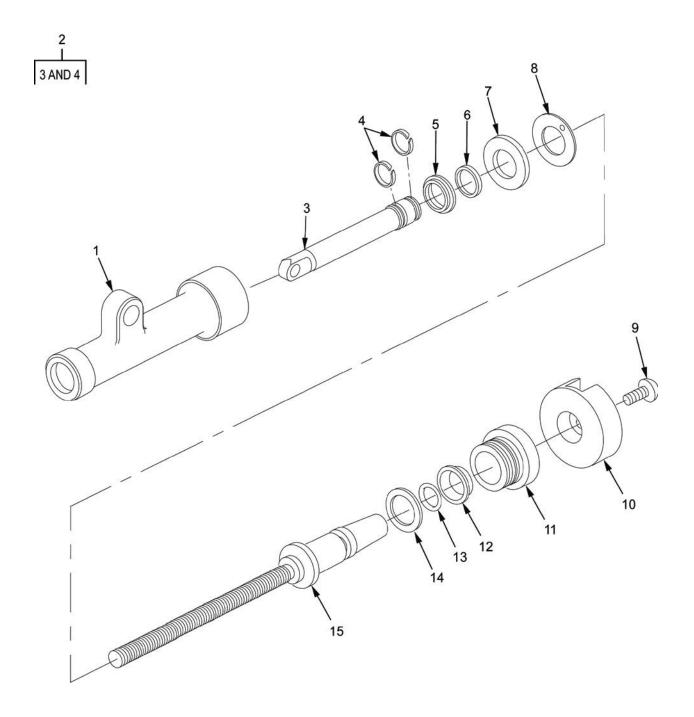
Cross Leveling Assembly 13015900 and Rod End Connector 13015920.
